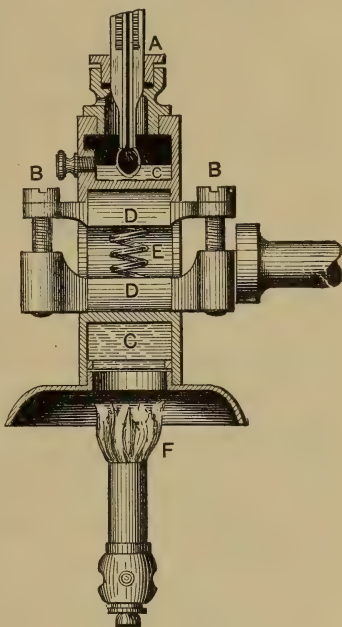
SECTION OF BOULT'S LUBRICANT-TESTER.
